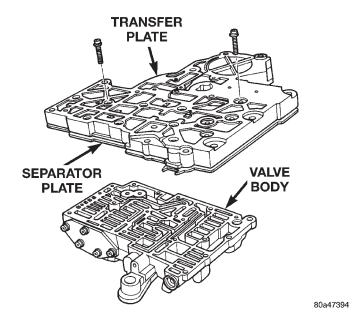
Valve Body Transfer Plate Screws (21) Remove shuttle valve end plate (Fig. 55).
